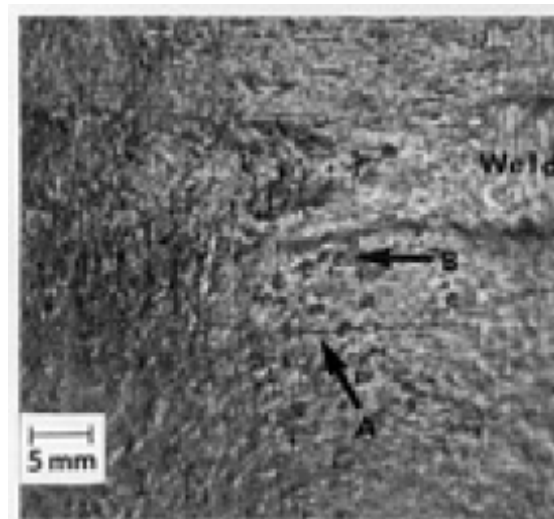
PHOTOGRAPH OF INSIDE SURFACE OF A PIPE SHOWING 38-mm (1.5 INCH) STRESSCORROSION CRACK (A) NEXT TO AND PARALLEL TO A CIRCUMFERENTIAL WELD. ALSO SHOWN ARE SHALLOW CORROSION PITS (B)
